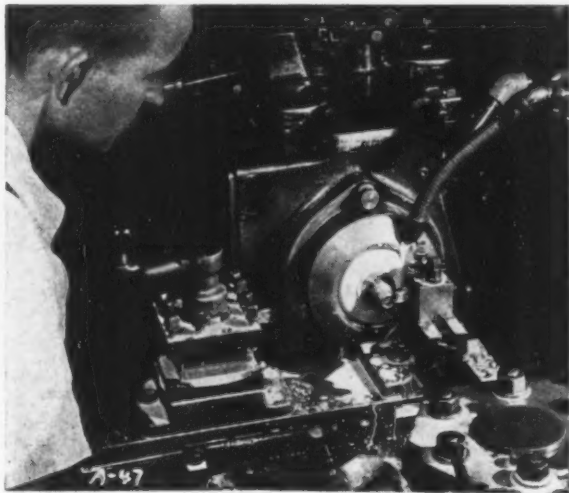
Facing front edge of bushing and machining a 45° bevel on outside edge. Use of tubing instead of bar stock eliminated drilling and reaming.
